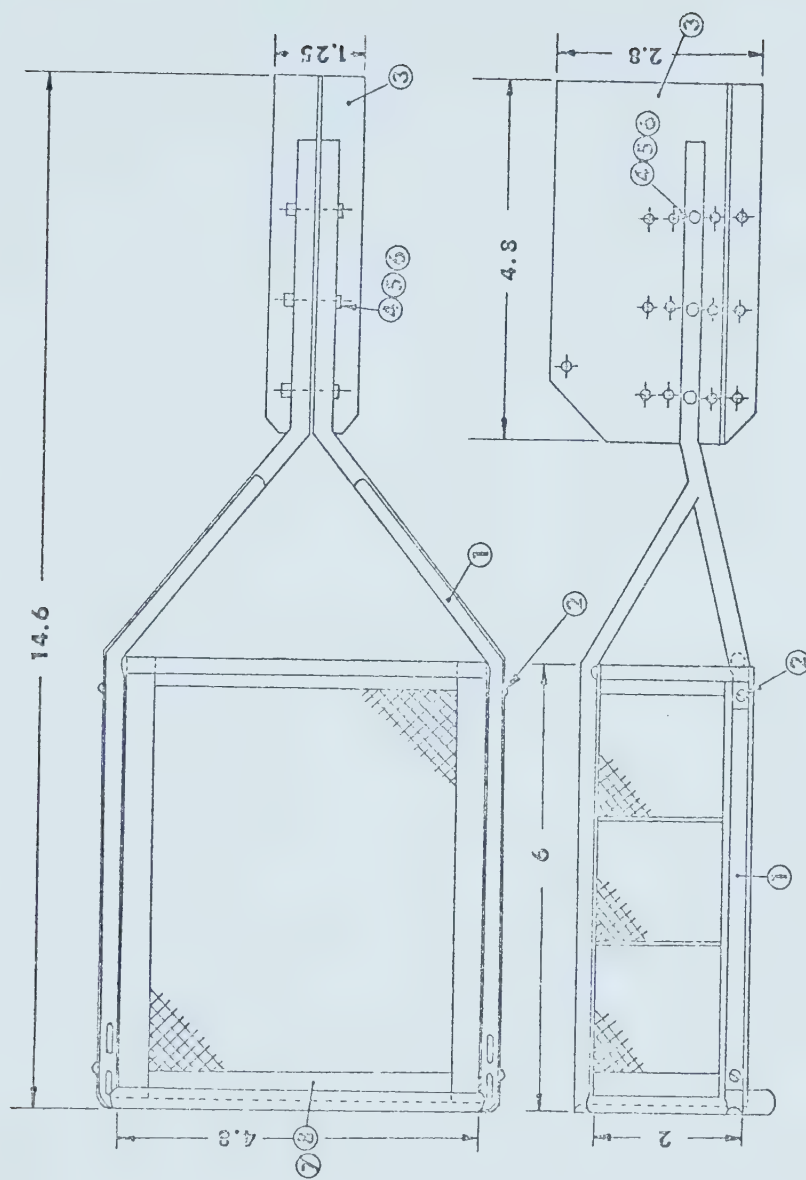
PLAN AND ELEVATION-MODEL BASKET BED-LOAD SAMPLER
